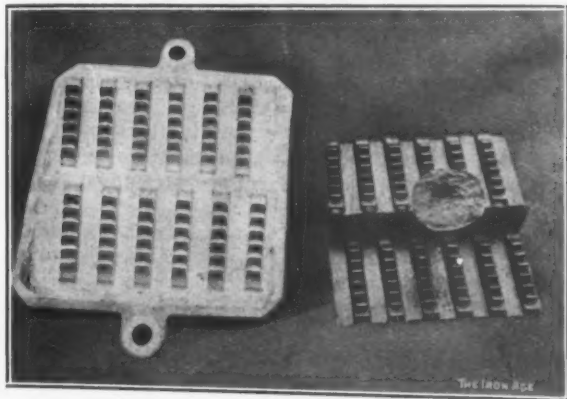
Castings Set Edge to Edge to Economize Space.
